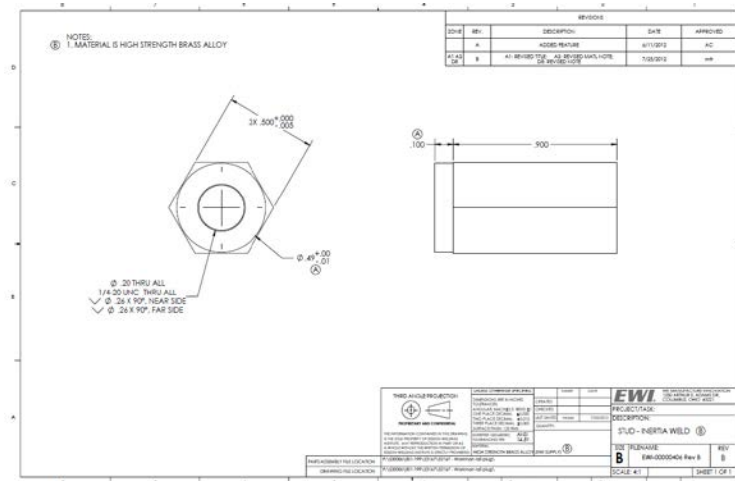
Stud Design used to Produce C360, C172, and C464 Welding Studs
